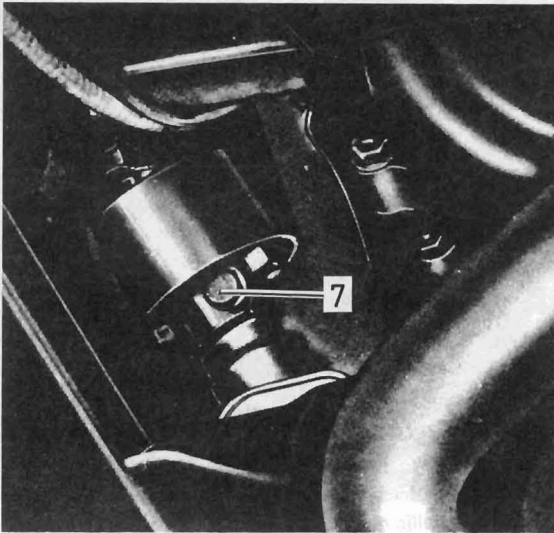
Steering shaft coupling pinch-bolt (7) (Sec 16)
